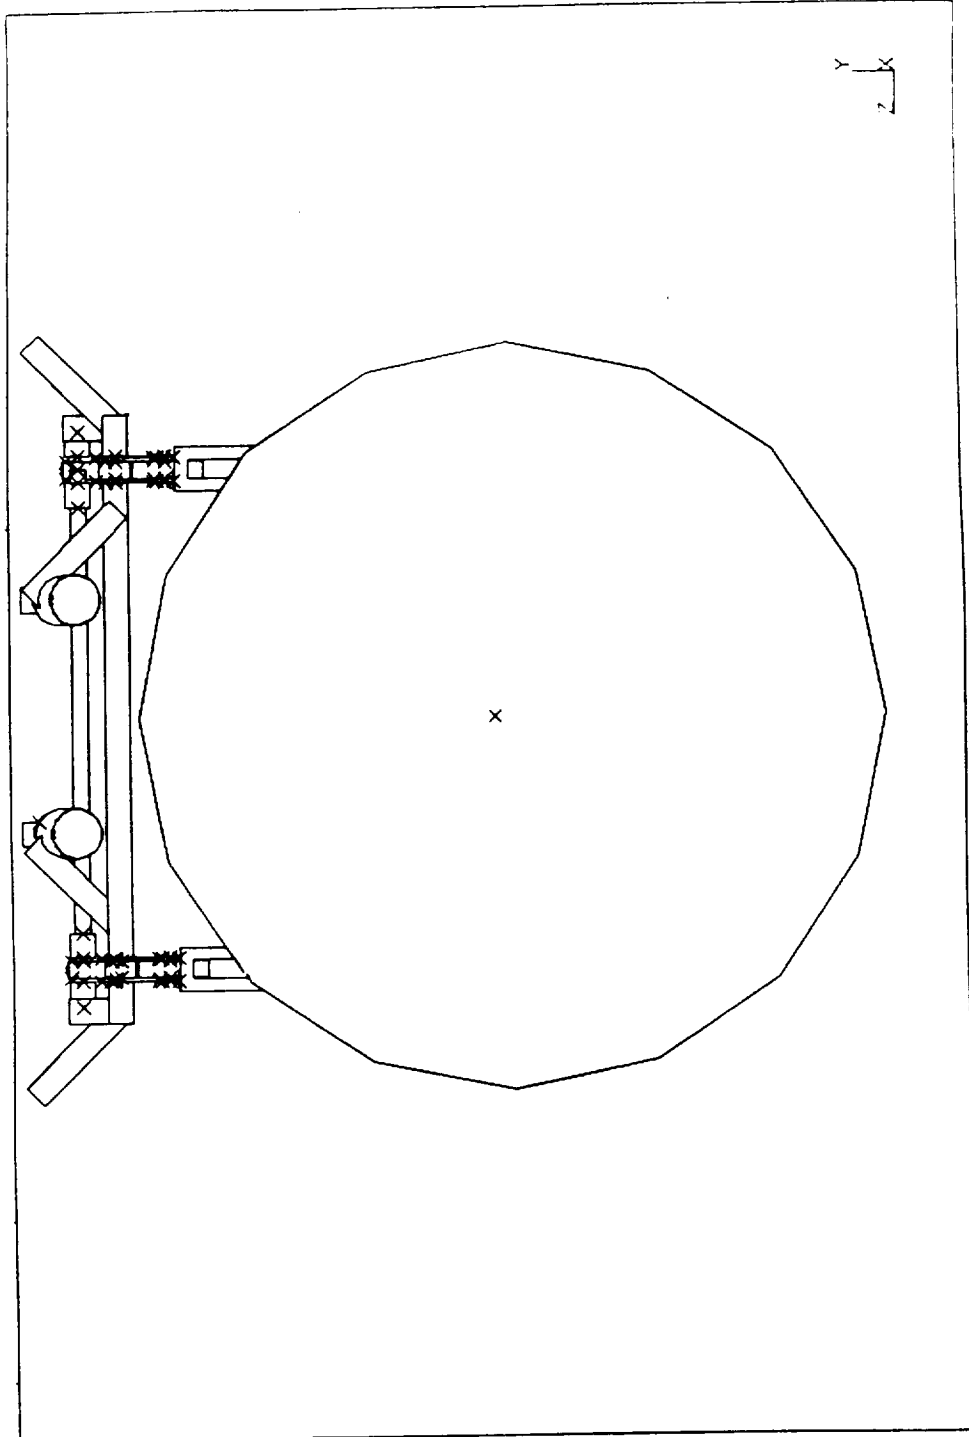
System Layout of Gryphon/Eclipse Attach Mechanism (Front View)
